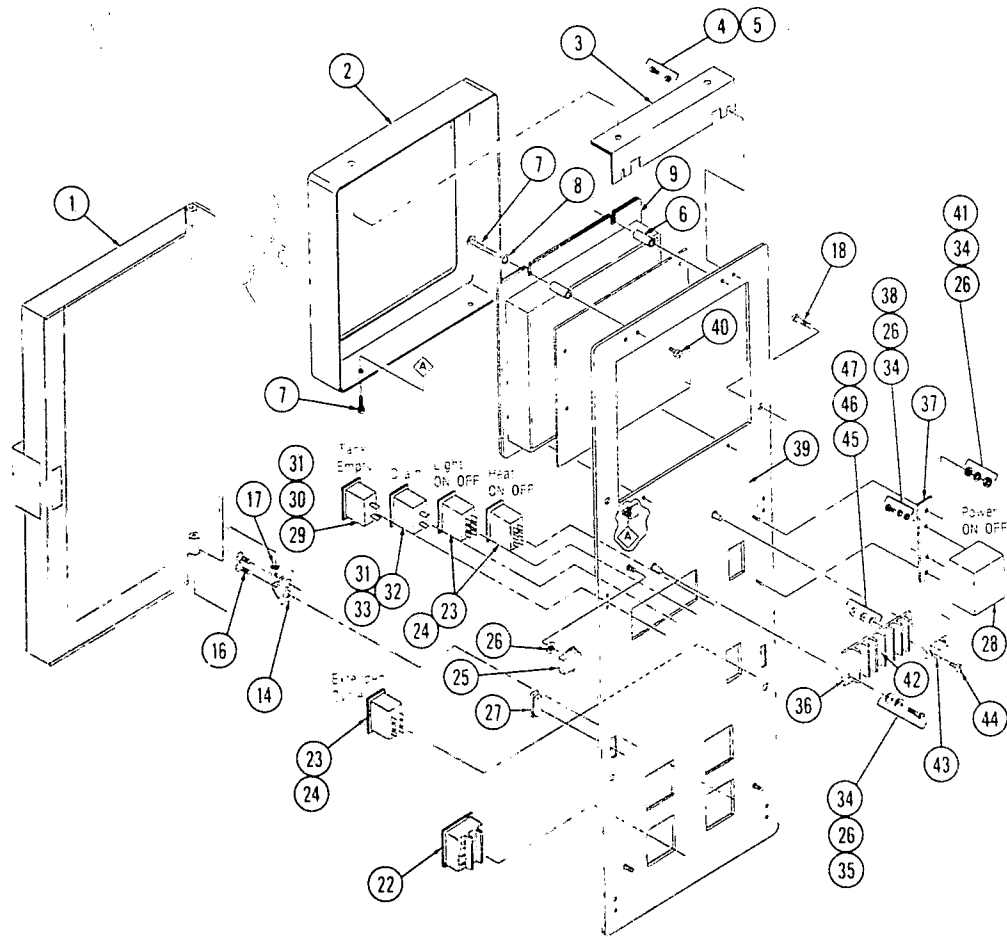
PANEL ASSEMBLY: Primary and Secondary.
